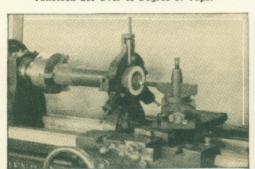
Cutting an Internal Thread in a Large Fig. 67. Piece of Work
